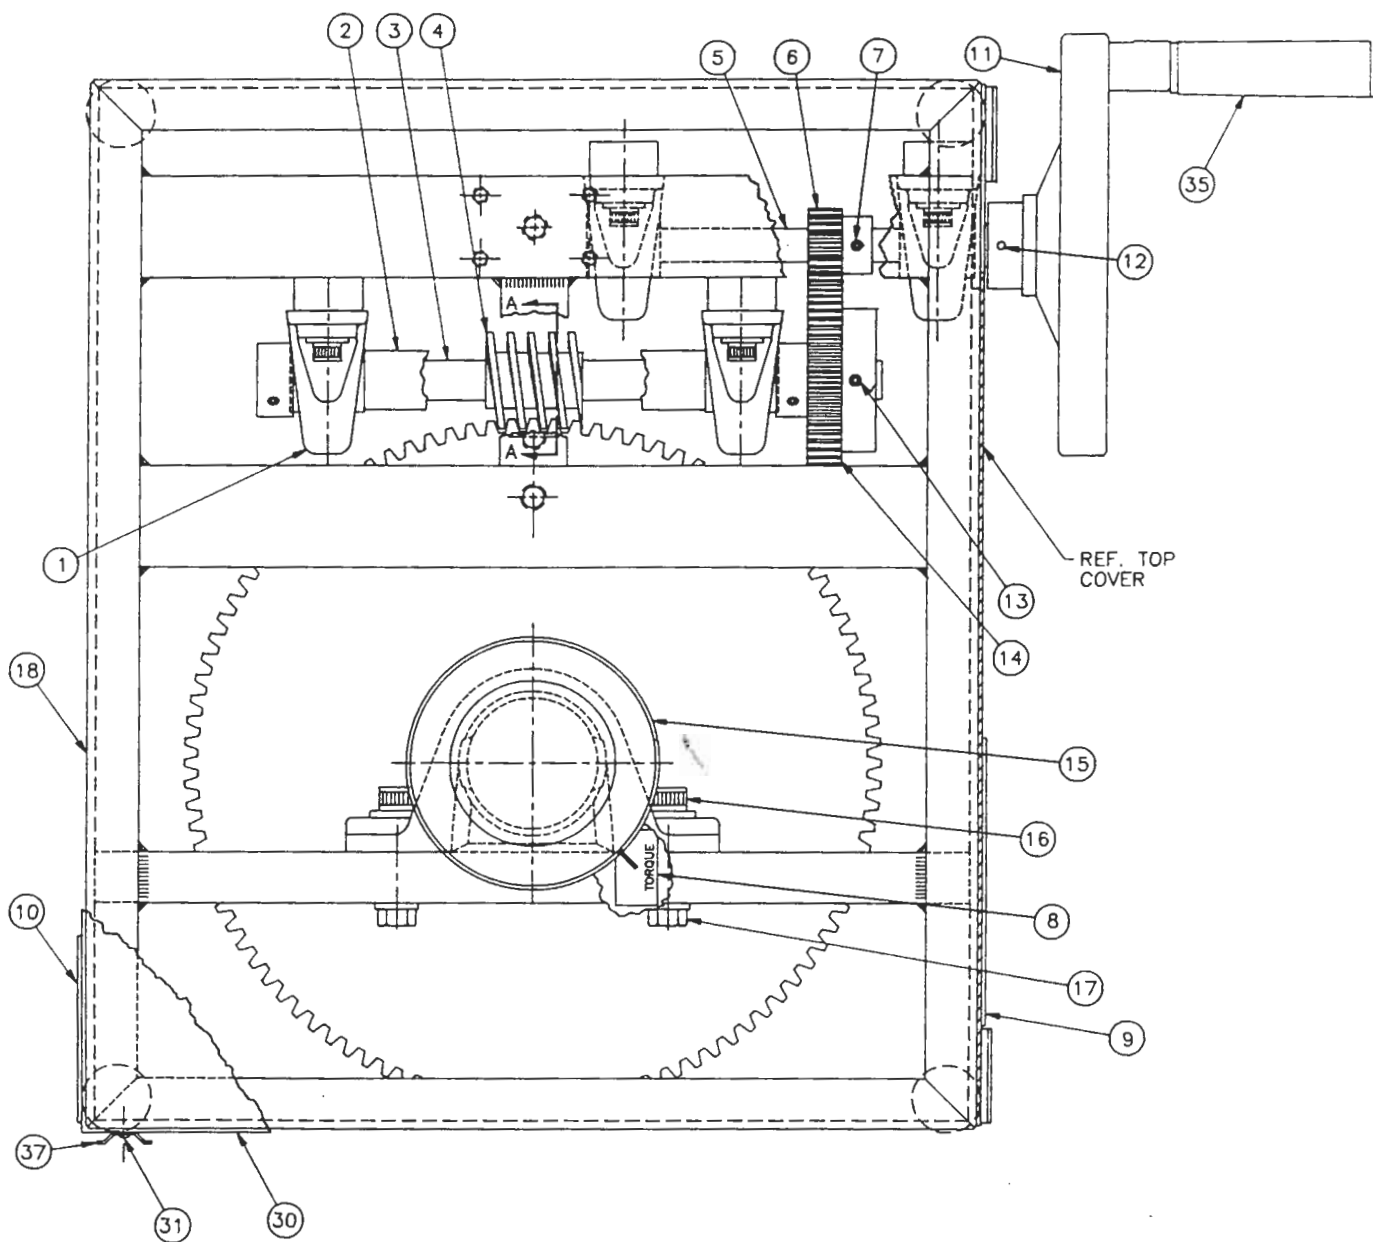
Low Torque Station Mechanical Loader (Sheet 1)
